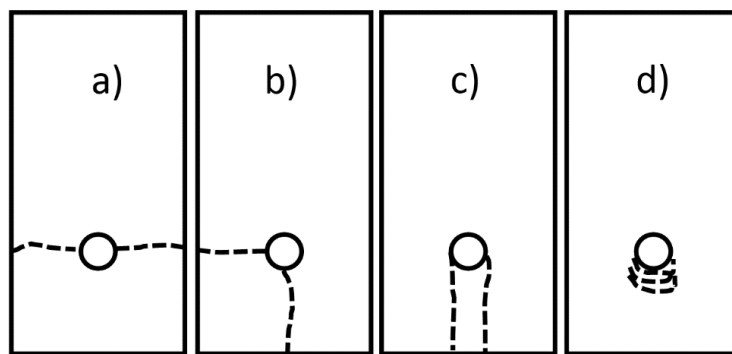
Failure modes of composite bolted joint. a) Tension failure, b) Cleavage failure, c) Shear-out failure, d) Bearing failure.
